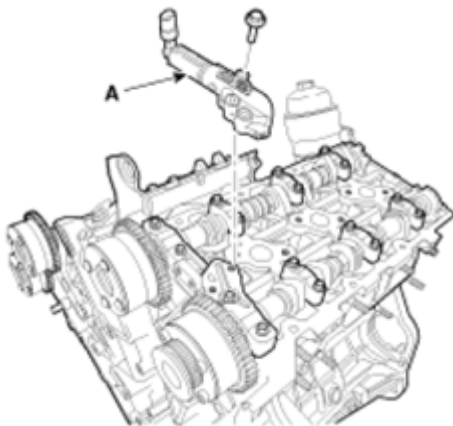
Identifying Exhaust Camshaft OCV (1 Of 2)
